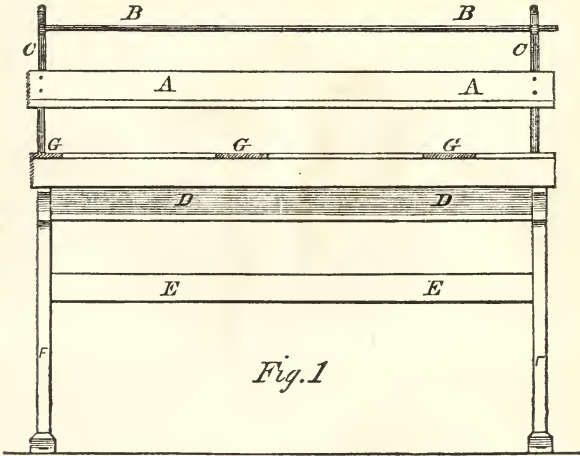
FRONT VIEW OF DRAWING DESK.
